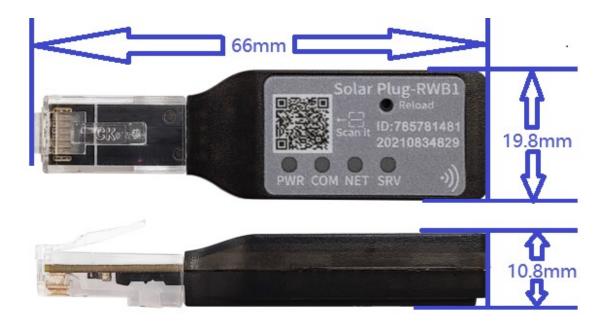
Solar Plug-RWB1 Mechanical Dimensions
